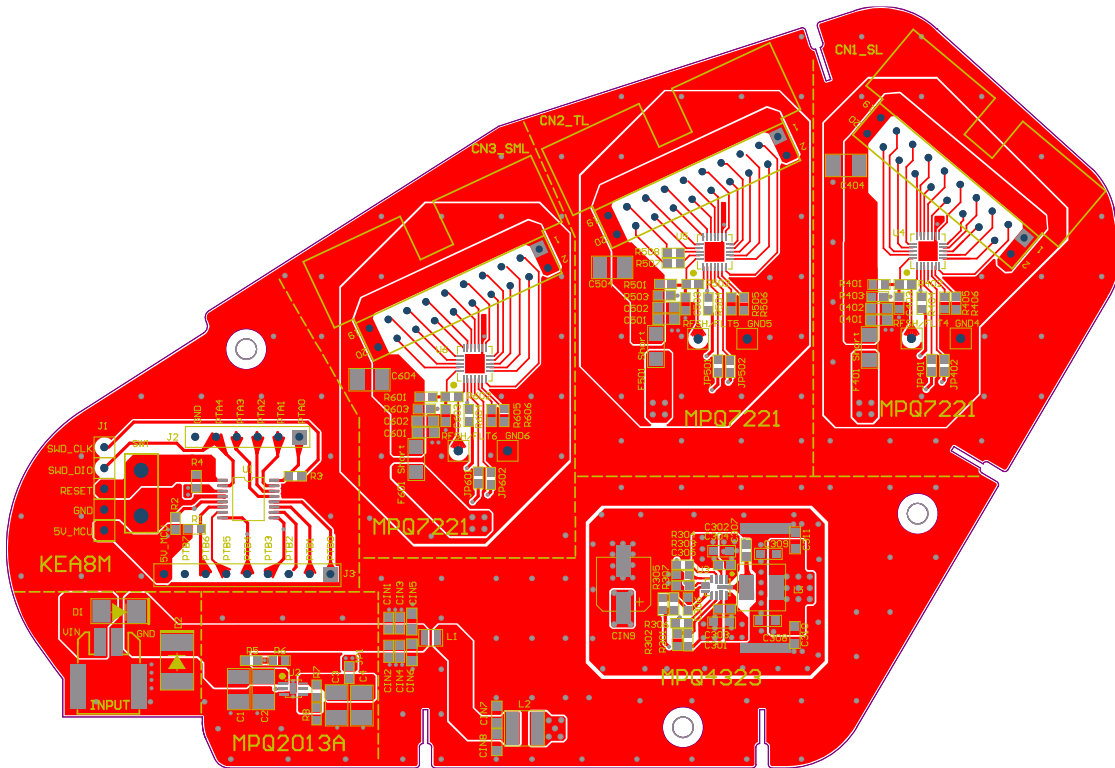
Top Silk and Top Layer of EVQ7221-TL-00A Tail Lamp Control Board
